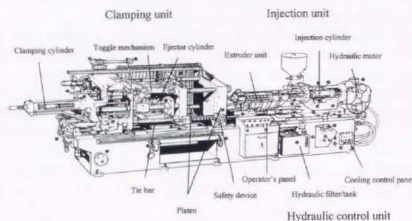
The structure of a typical hydraulic injection molding machine in use today
